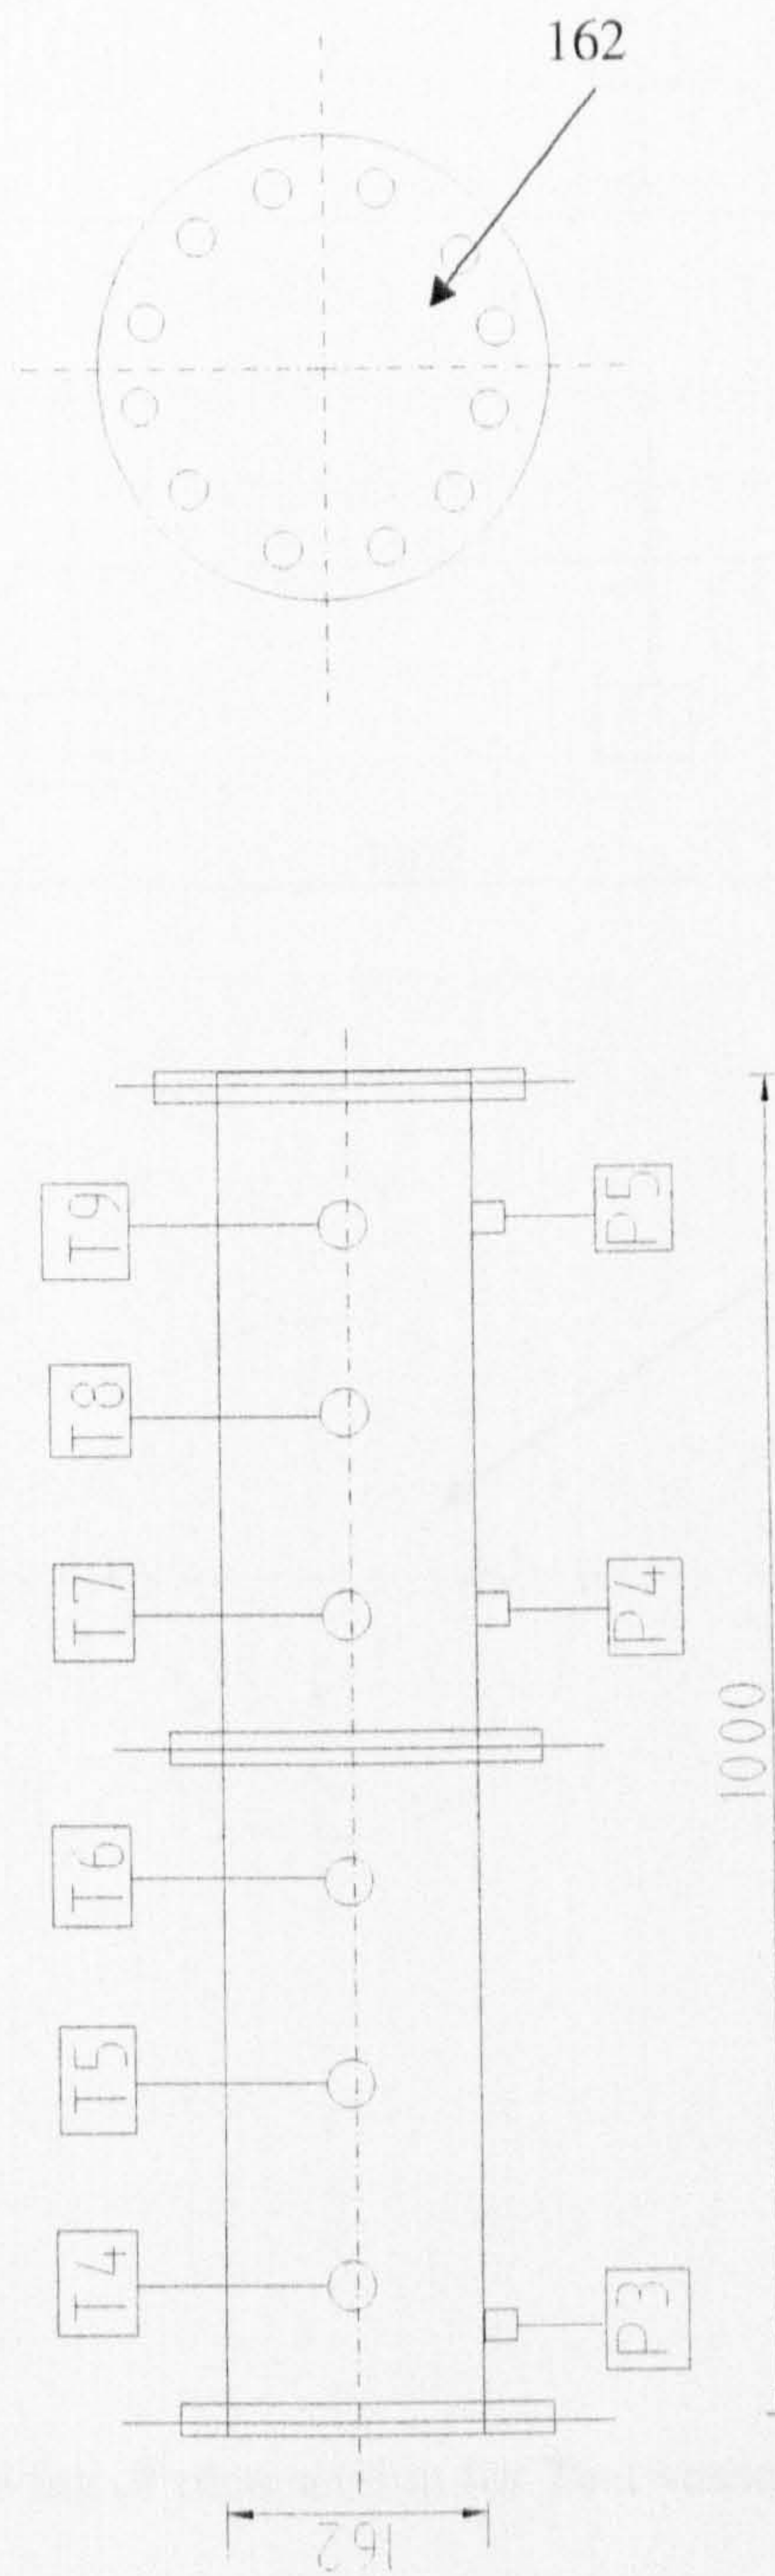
Scaled drawing of pipe section for Test vessel 3.
